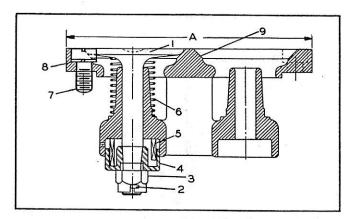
Suction Valve, Multiple Style, Y-35 and Y-38 Type, 6" to 11" Compressors
